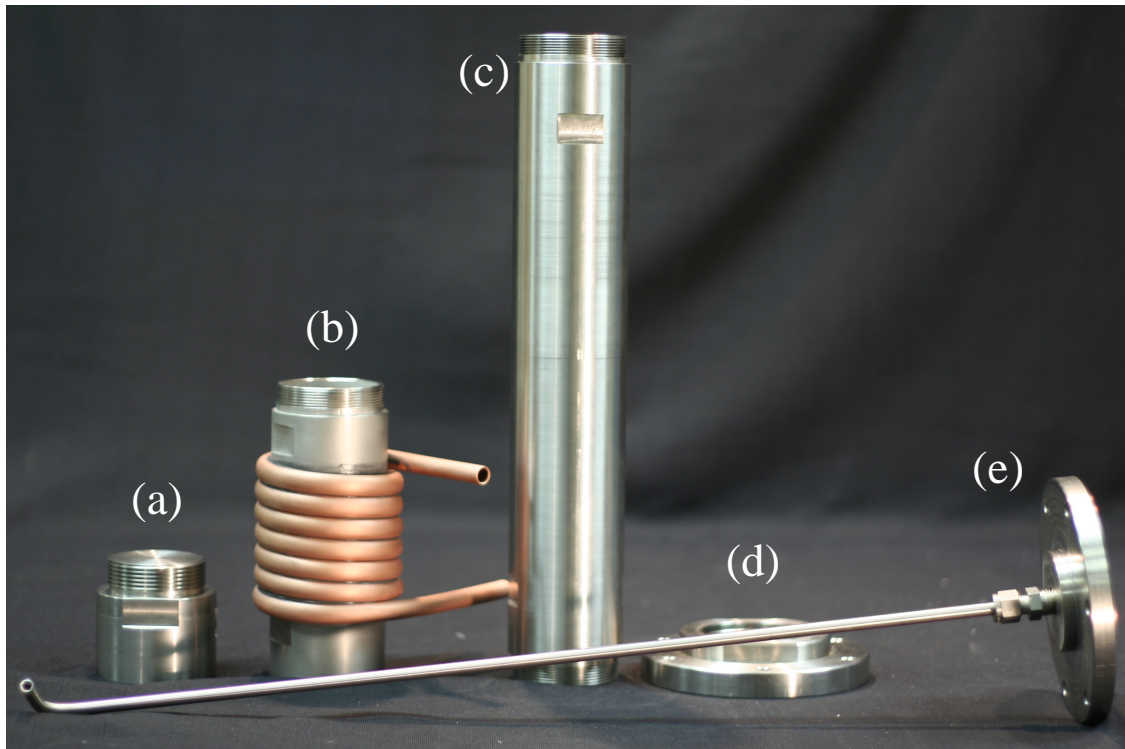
Top loading-column assembly: (a) load-cell thread adapter; (b) heat-exchanger; (c) loading-column main pipe; (d) die-holder; and (e) top die-ring with air-sealed fitting and pipe for the pressurizing gas used for bulge forming.
